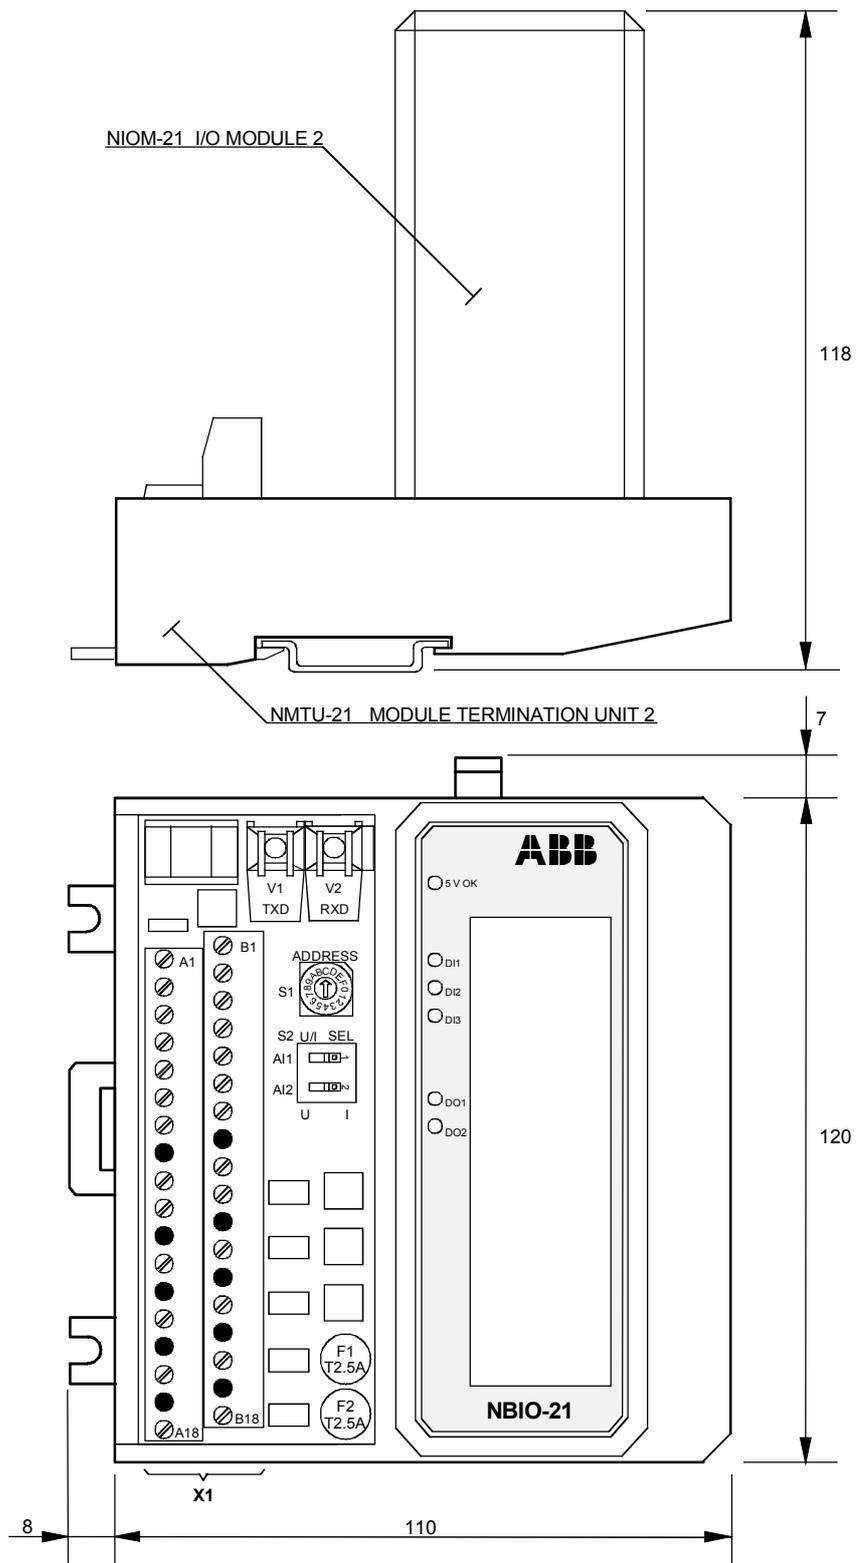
15 NBIO-21 I/O Unit Dimension Drawing.
